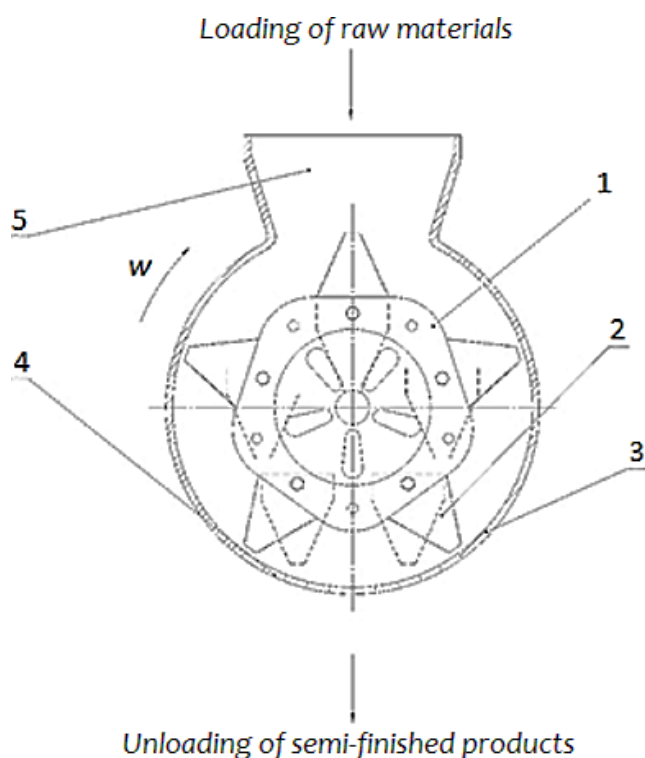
The scheme of the device for the production of coniferous flour. 1 – rotary part; 2 – knife; 3 – device body; 4 – separator with holes; 5 – bulk loading spout.
